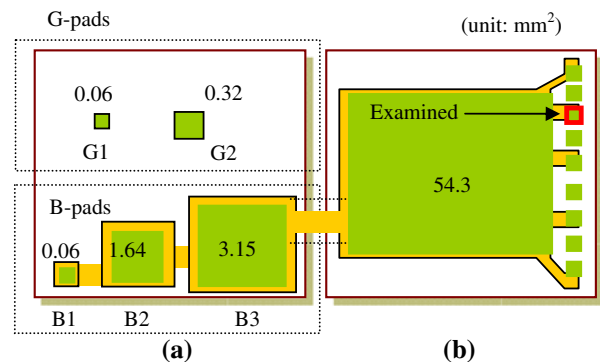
Schematic PCB diagrams showing the pad arrangement of (a) the wire bonding pads and (b) the solder pads fabricated for the PCB test sample. The numbers displayed in the pads are their areas in units of square millimeters. The pads surrounded by solid lines are internally connected to each other as well as to the sides of the wire bonding pads and solder pads.
